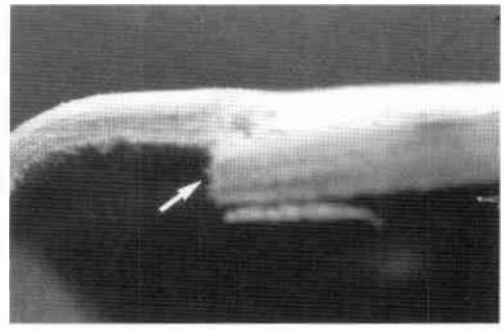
Photograph of a cross-sectional view of a "tear" type failure.
